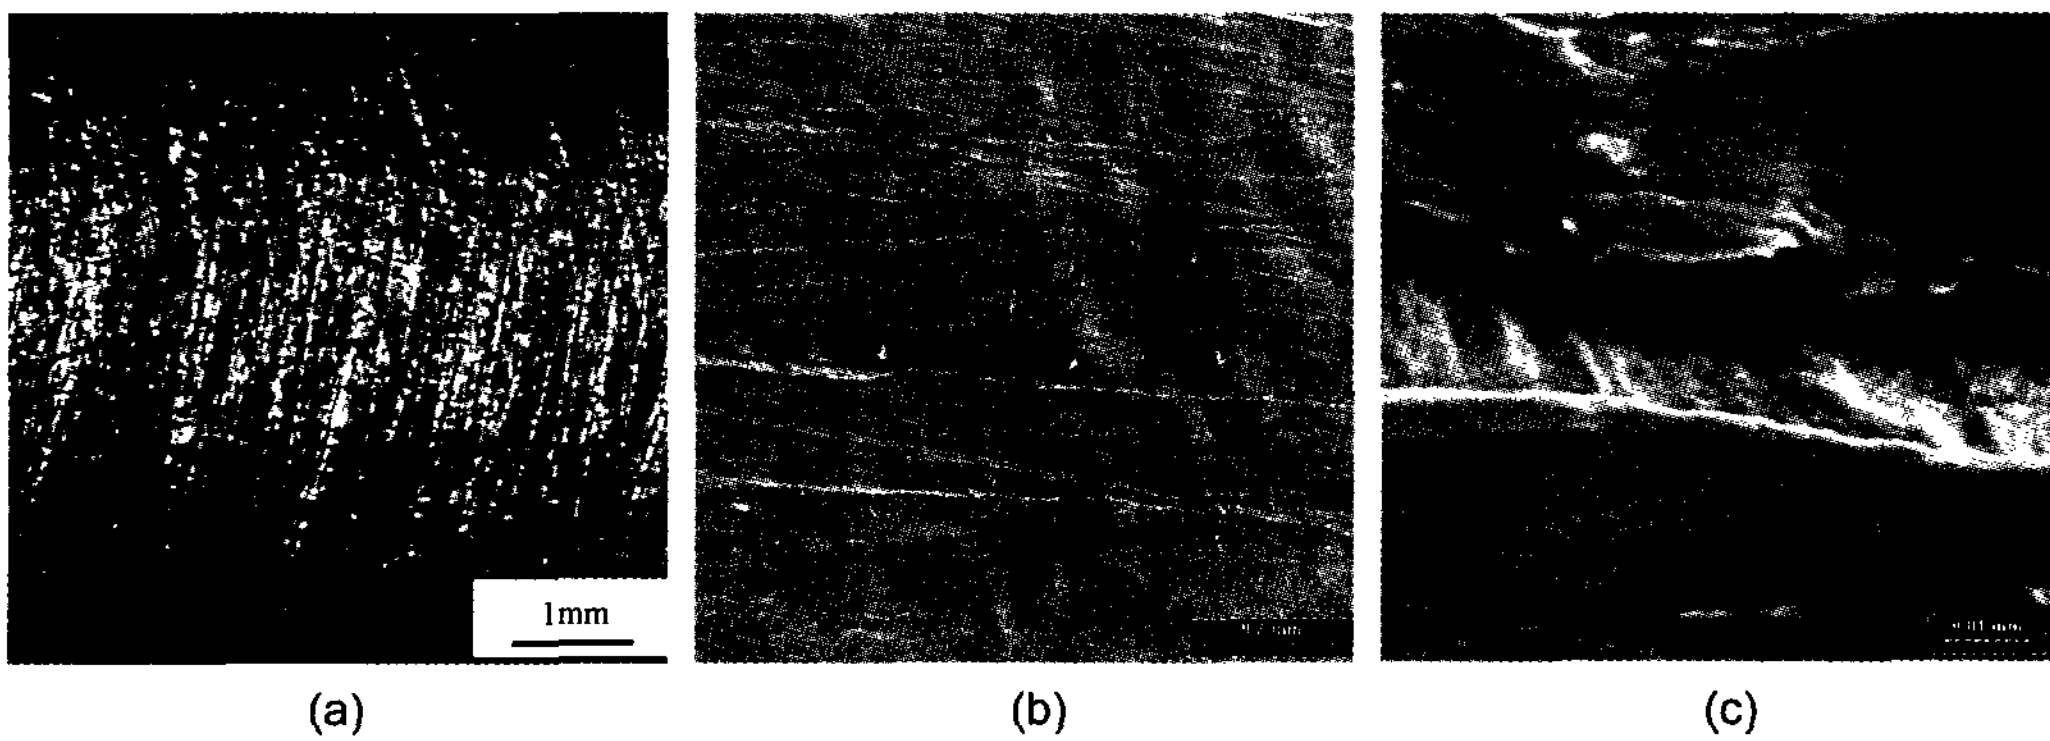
Surface morphologies of fractured specimen with Ra = 2.0 μm
